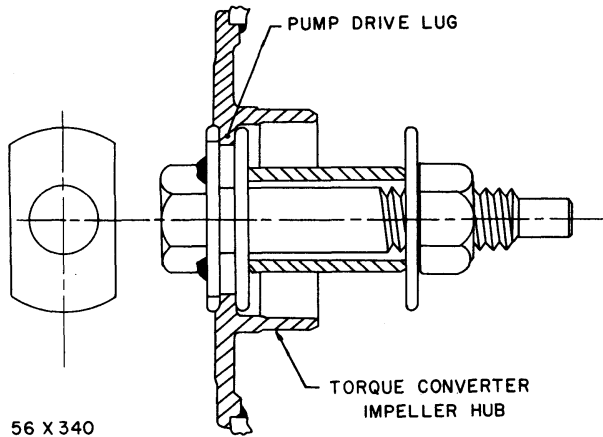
Tool C-3461 Installed in Torque Converter Hub
